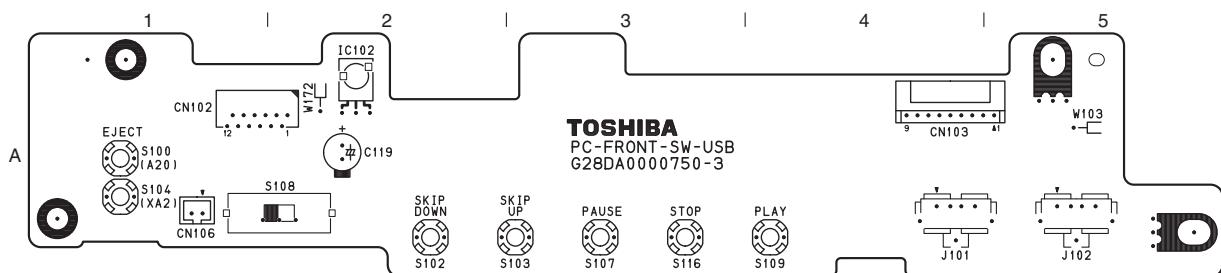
Front Switch/USB PC Board (Top side)
